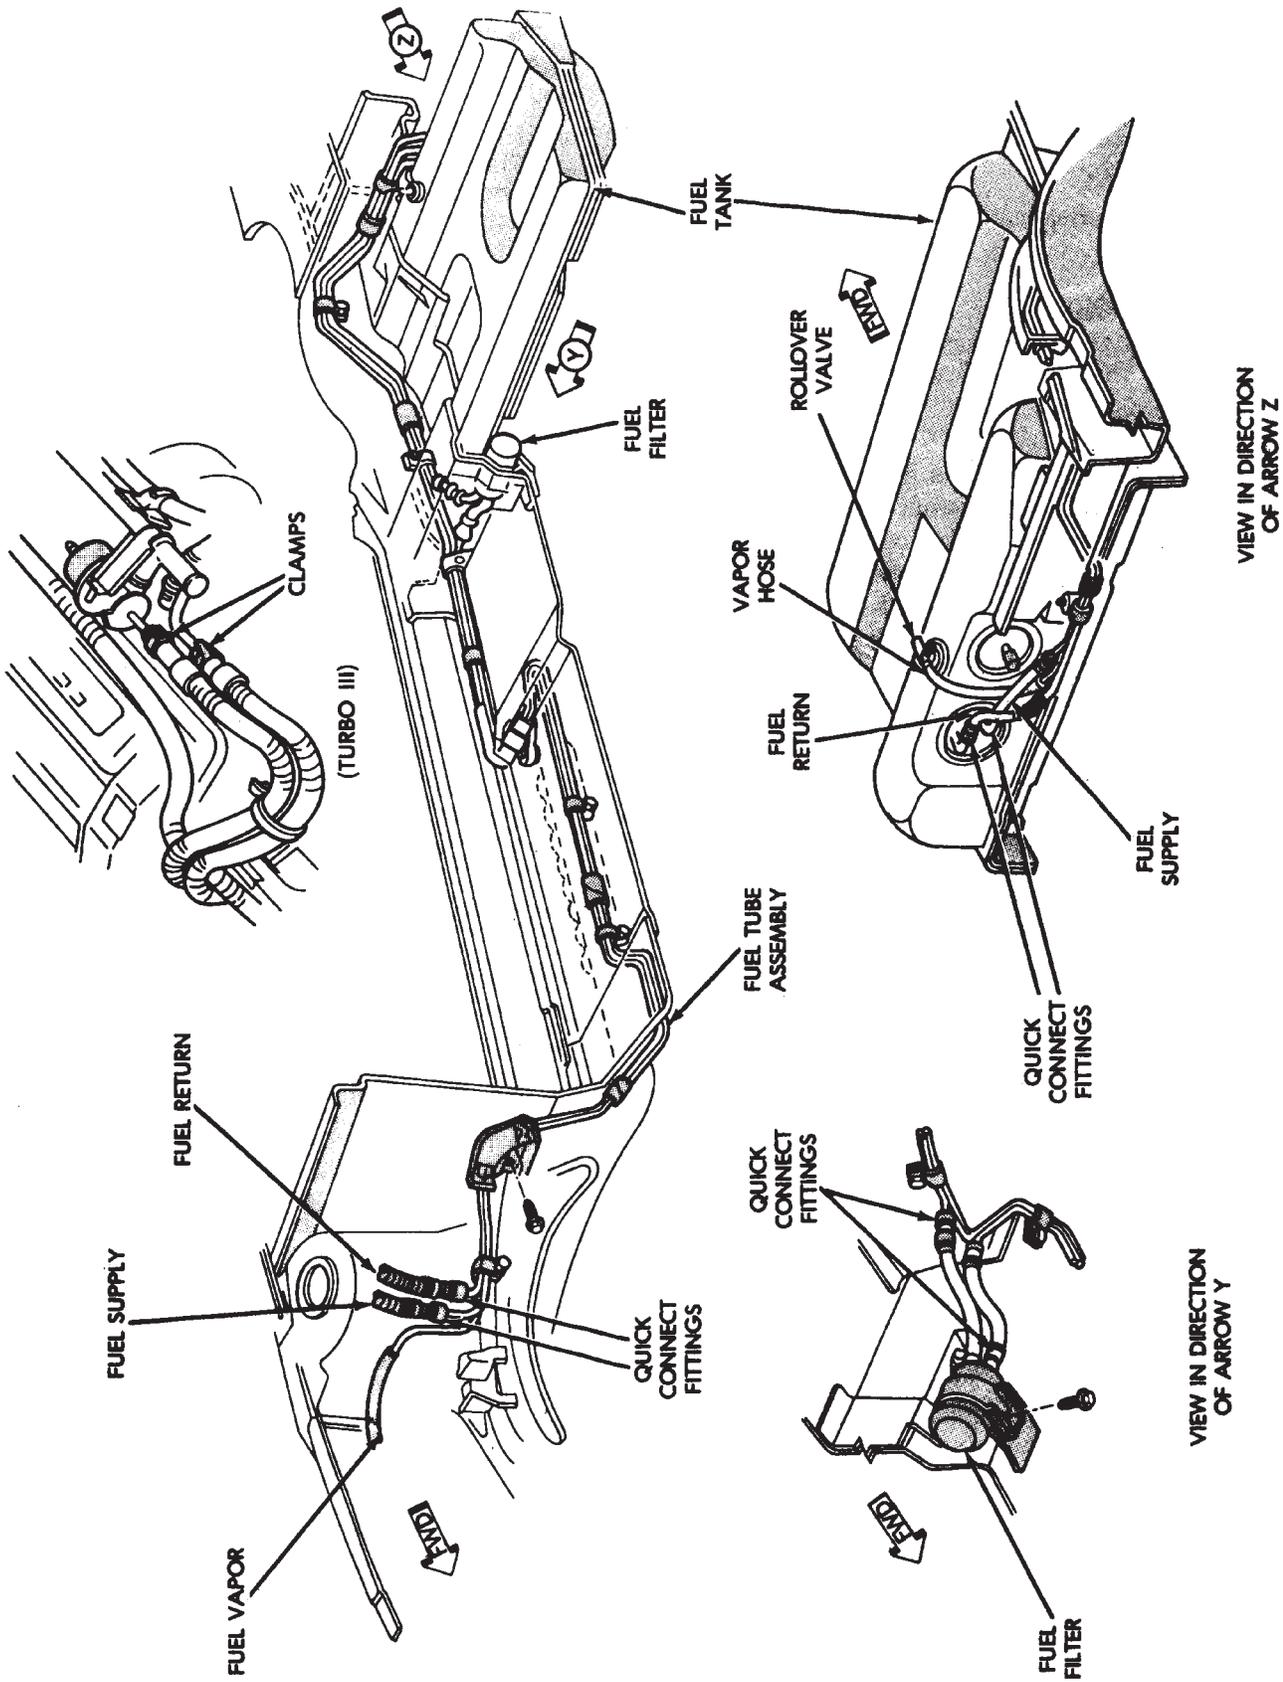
Fuel Tank, Filter, and Chassis Line Routing
